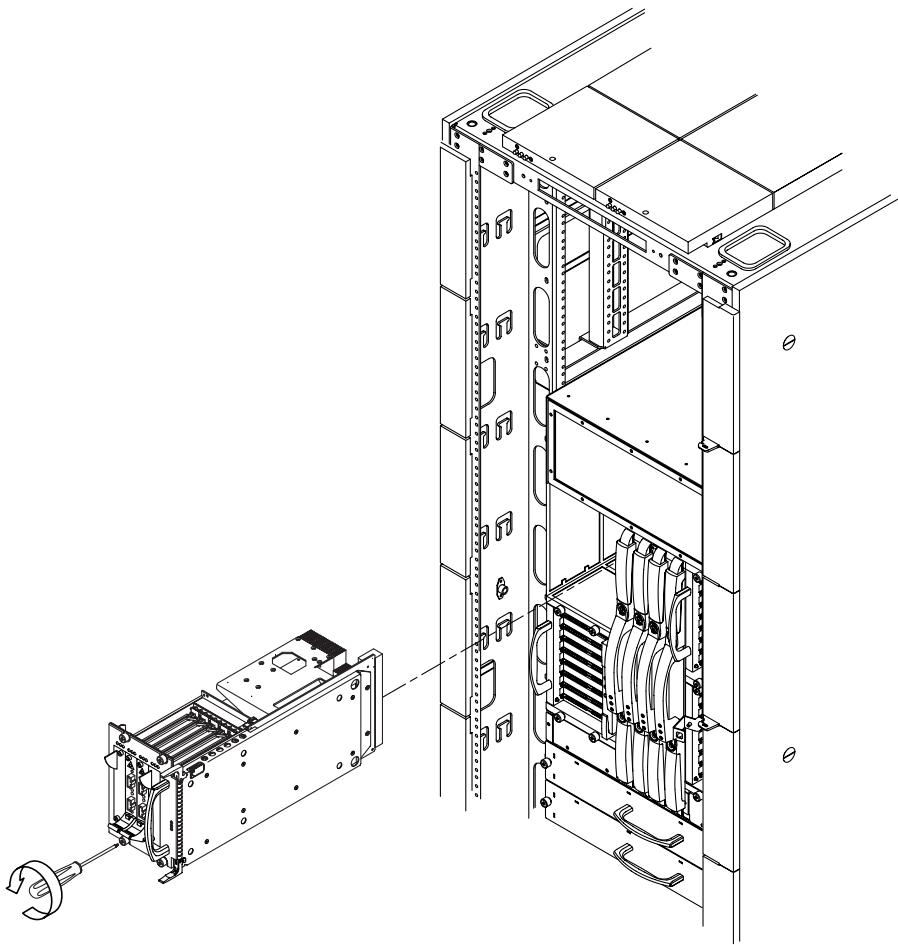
Replacing a Sun Fire Link Assembly in a Sun Fire 6800 System
